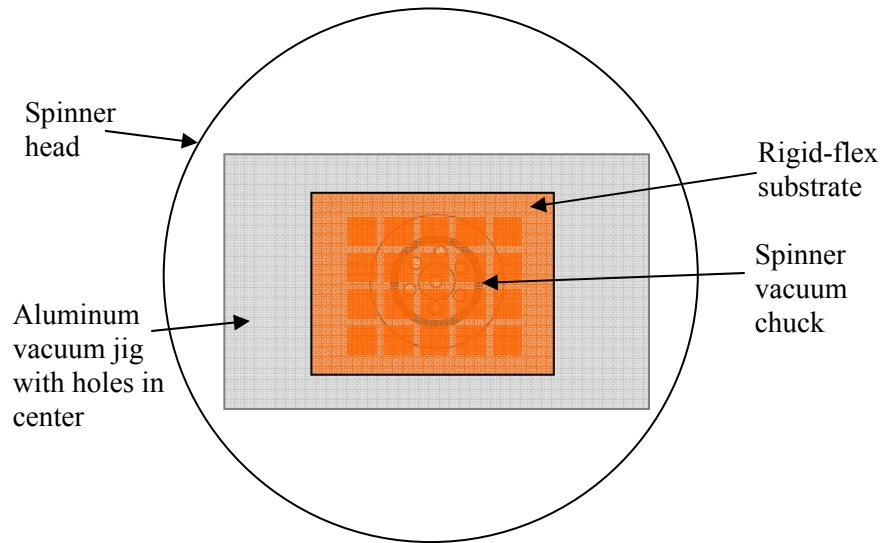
Overhead view of rigid-flex substrate over a vacuum jig held in place on the spinner head.
